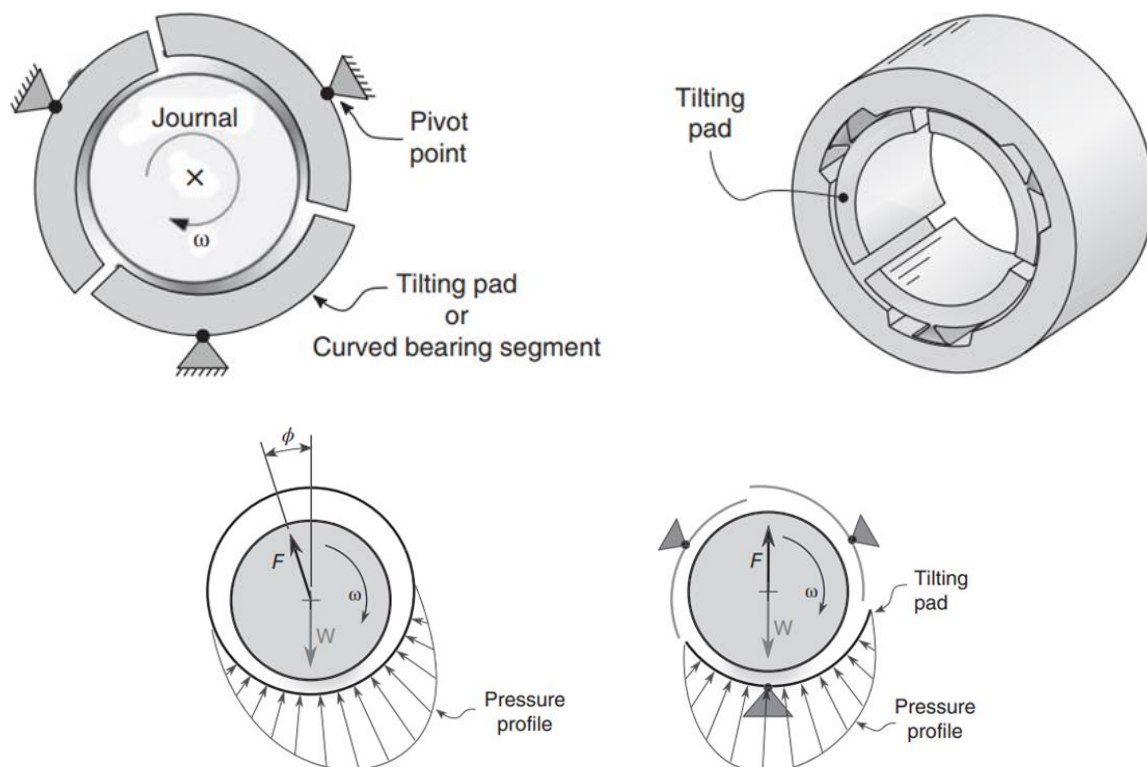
Schematic illustration of a tilting pad bearing with three pads.
